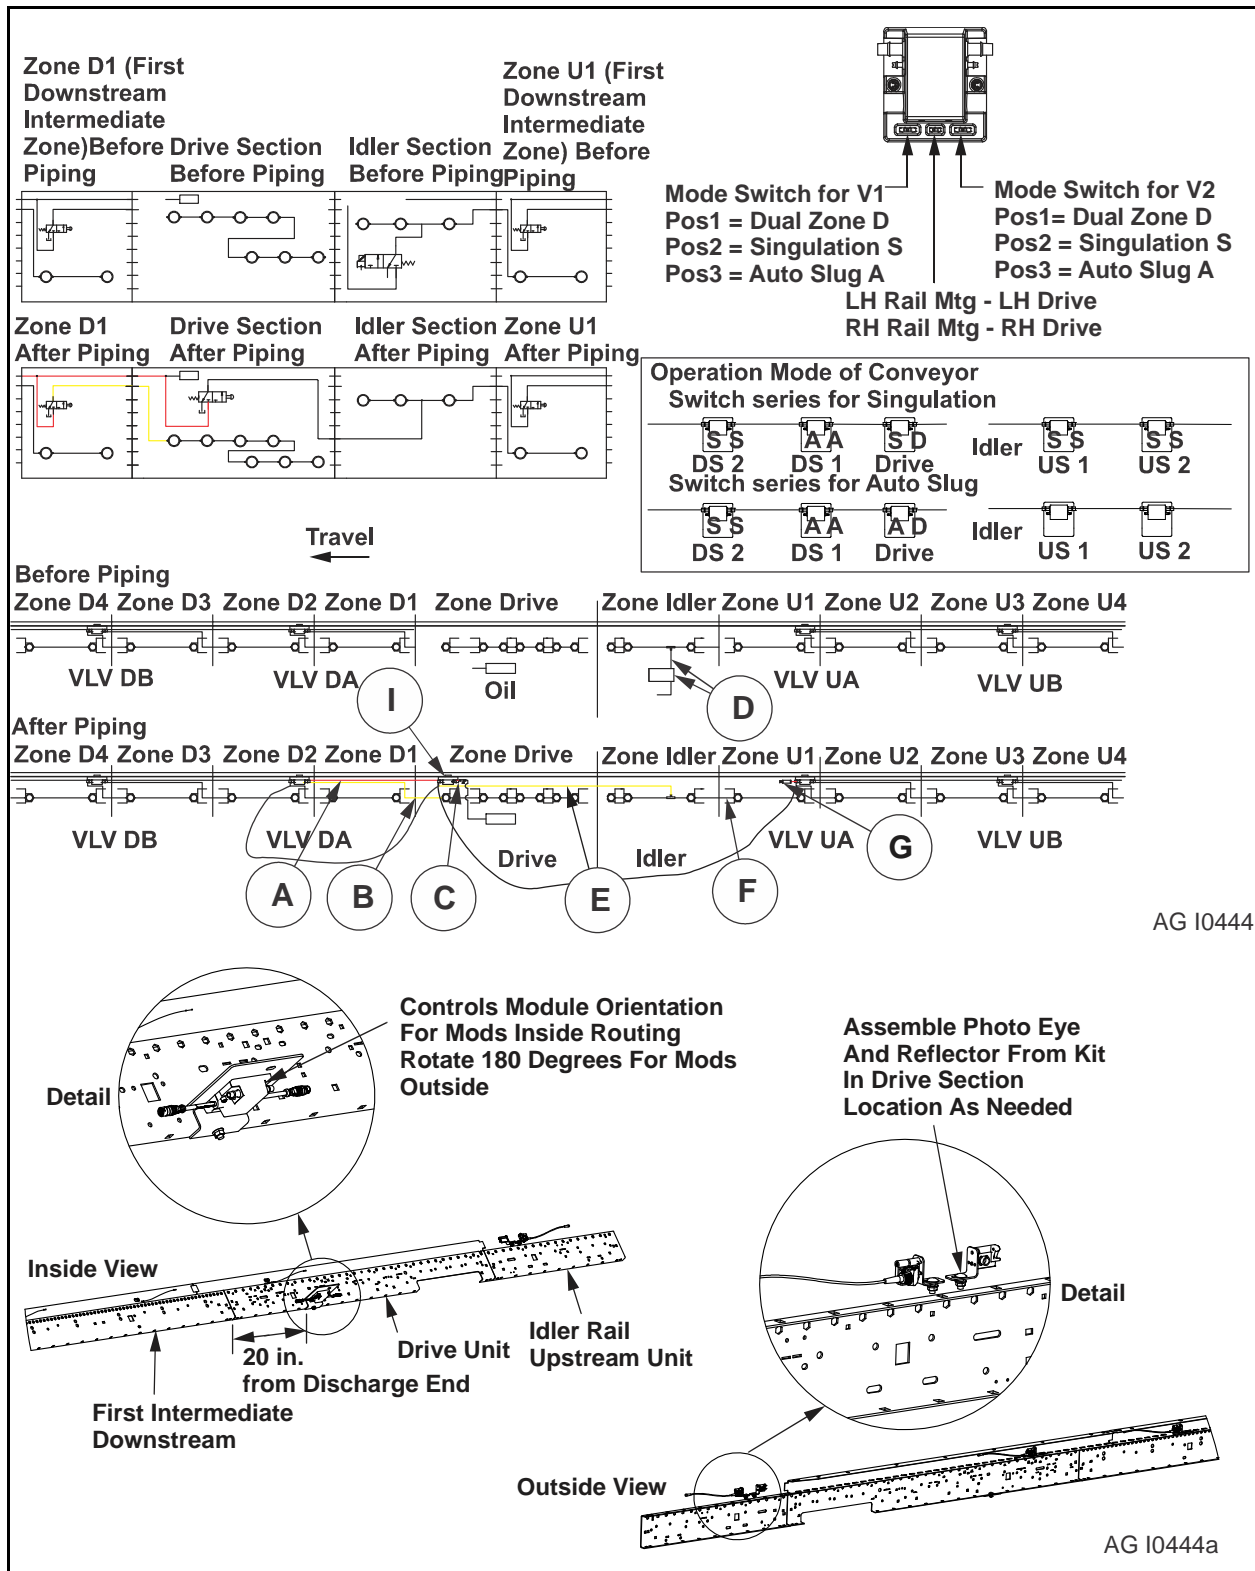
8 Interface Head-Tail (GEN 1.5) Field Kit
